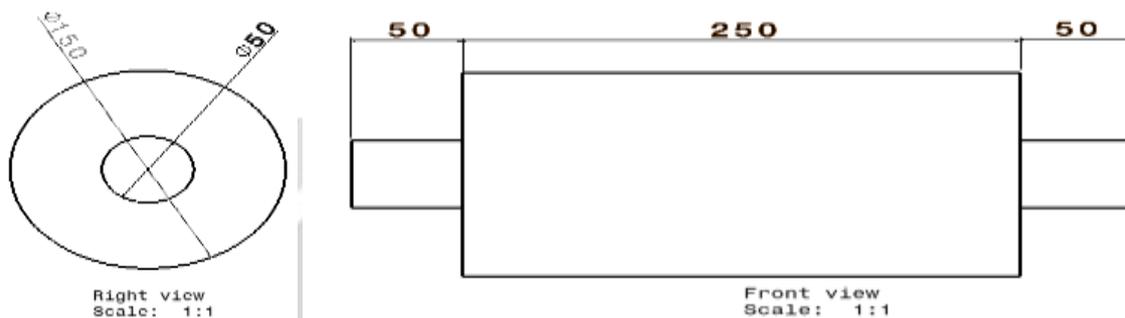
Geometry of simple expansion chamber (All dimension in mm)
